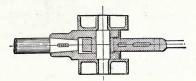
Crosshead and slide-blocks of a locomotive-engine.
